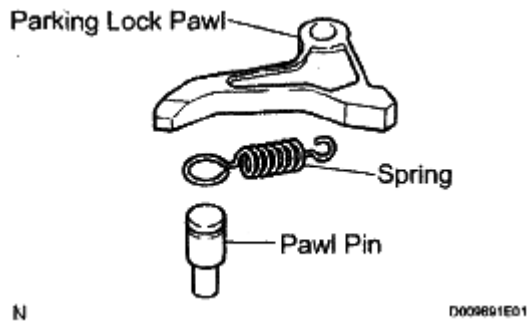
Identifying Pawl Pin, Spring And Parking Lock Pawl
